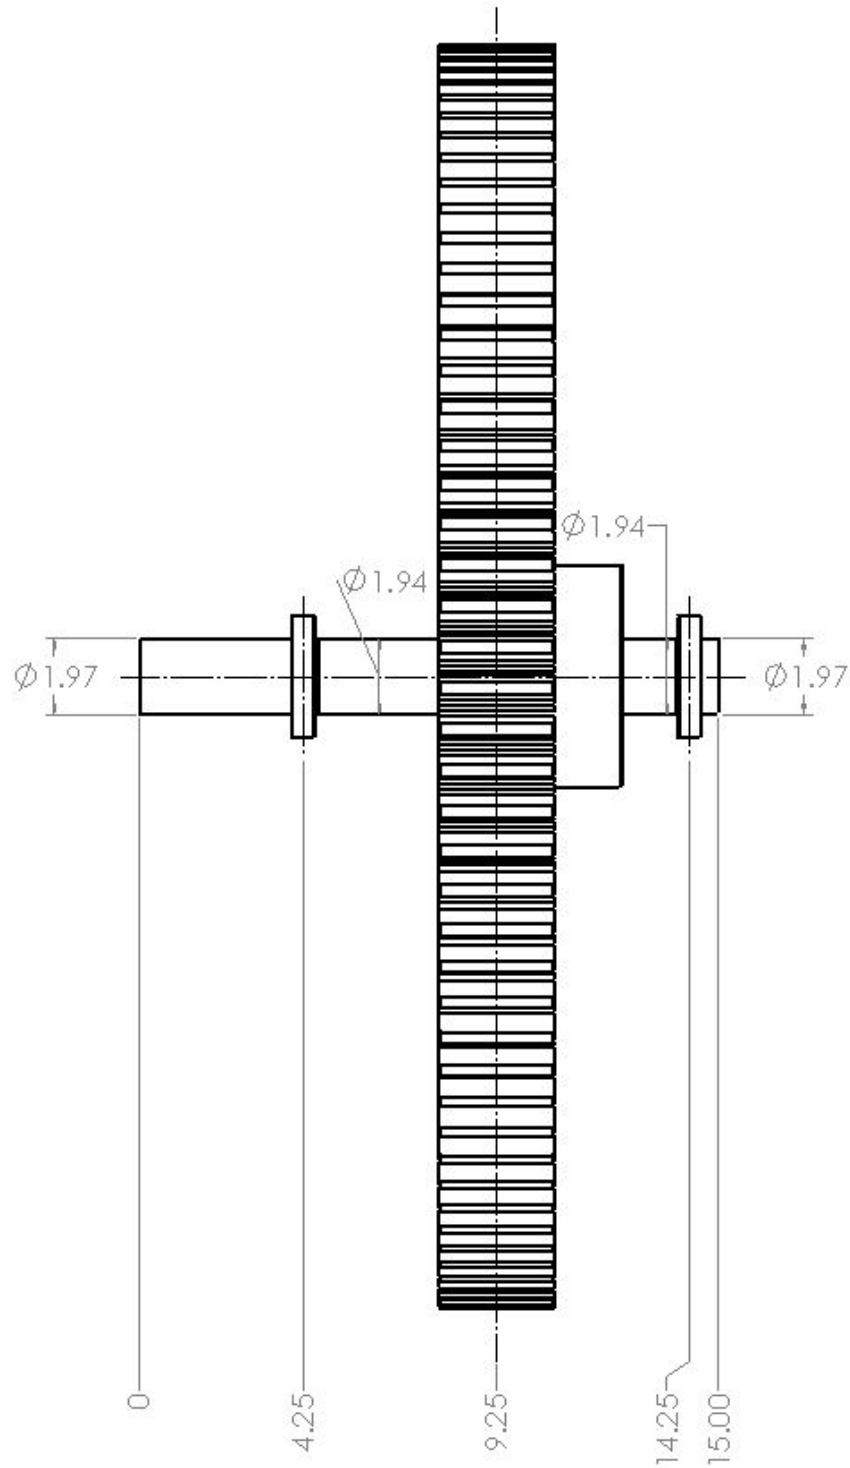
Location of Mounting Features on the Output Shaft and Output Shaft Dimensions
